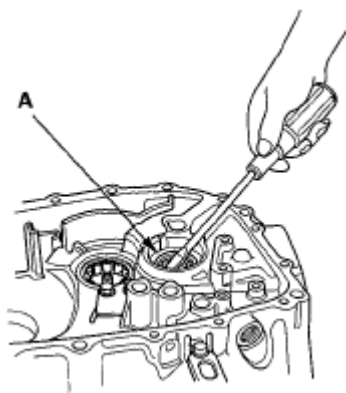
Identifying Ball Bearing, Clutch Housing And Adjustable Bearing Puller
